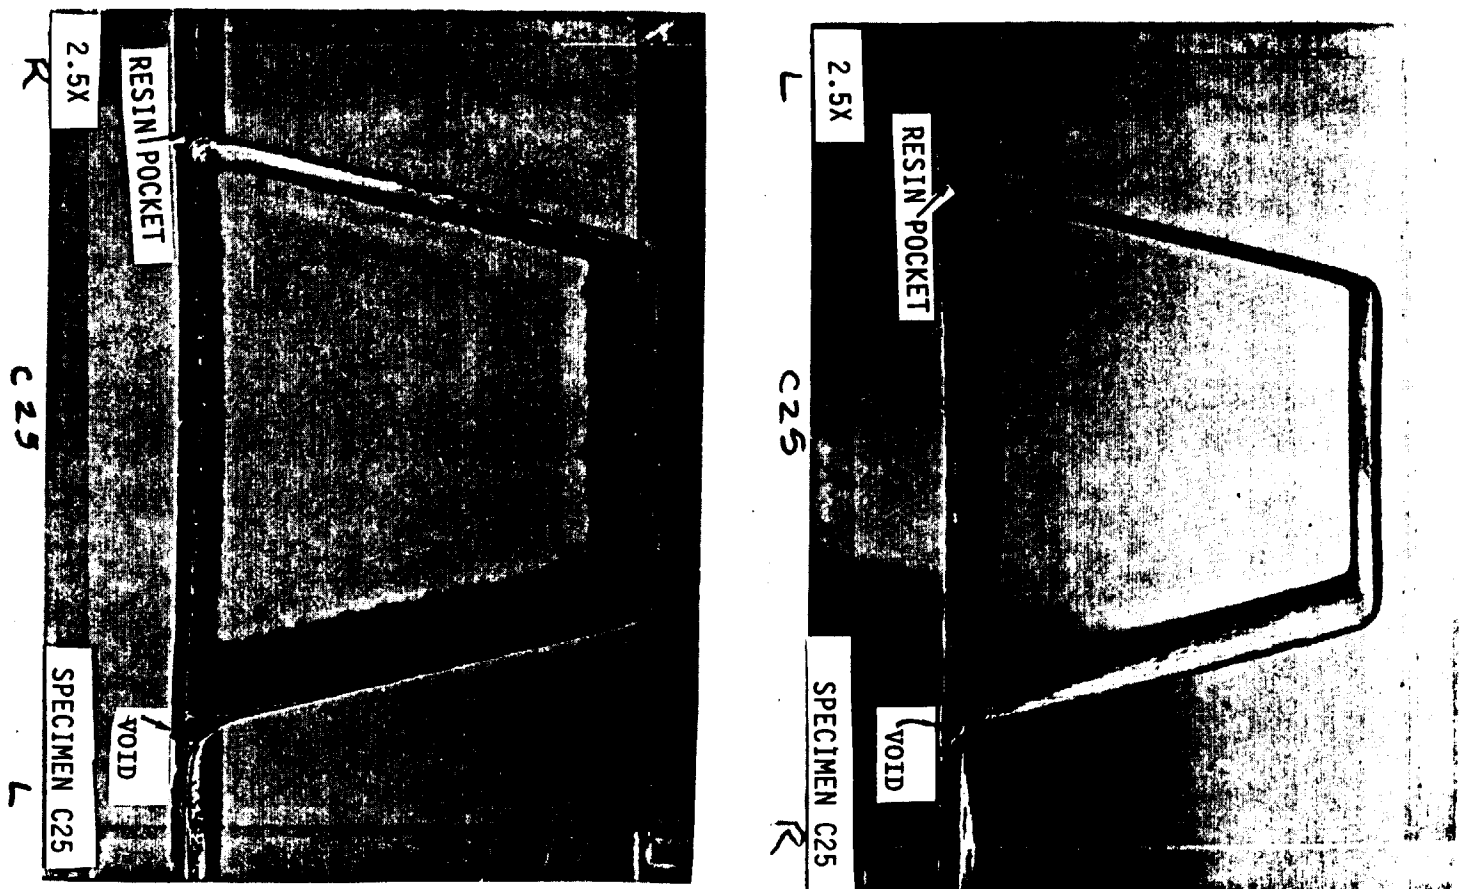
STIFFENER CROSS SECTIONS FROM FULL-SCALE SPECIMEN
